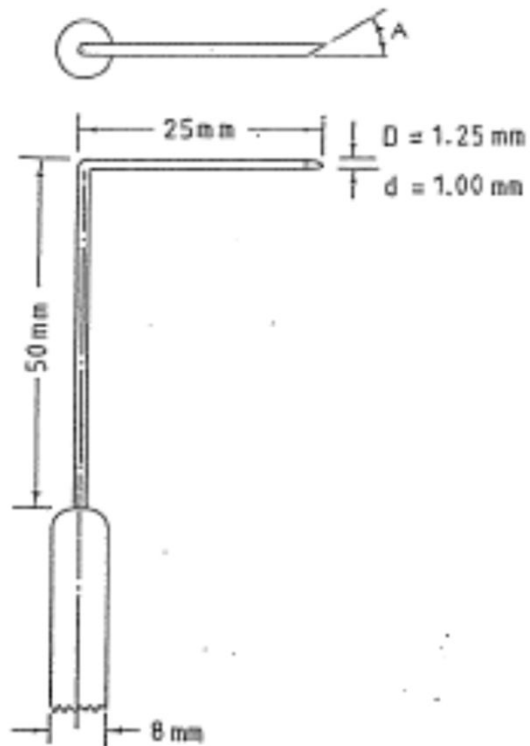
Slanted tube geometry for yaw angle measurement
